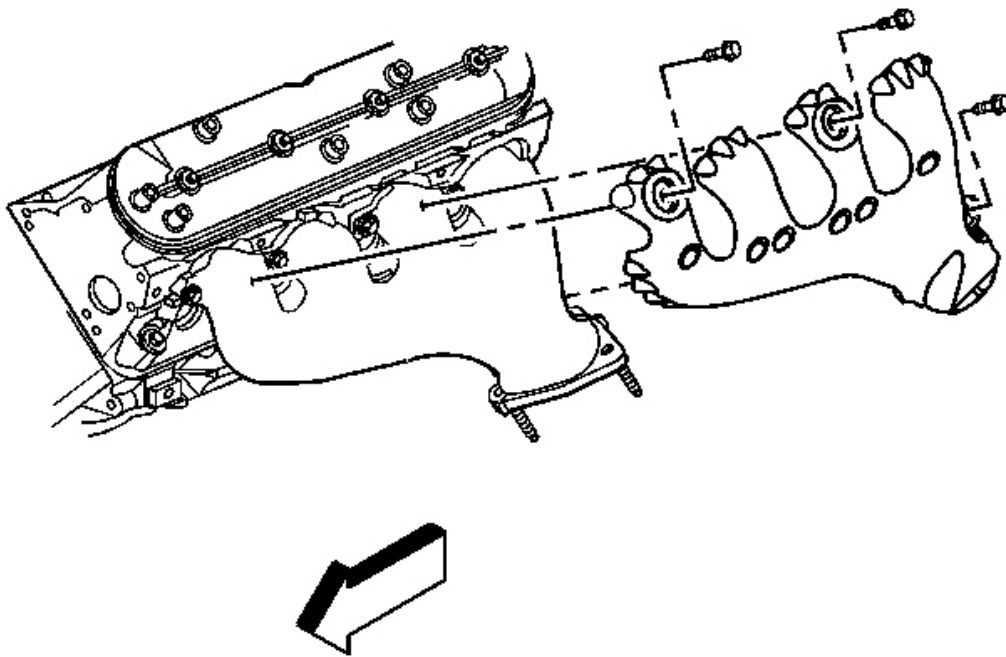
View Of Left Exhaust Manifold Heat Shield
